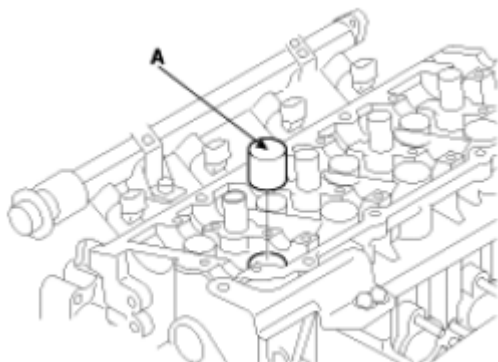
Identifying HLA (Hydraulic Lash Adjuster)
